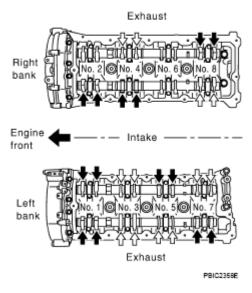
Locating Valve Clearances Mark Location Courtesy of NISSAN MOTOR CO., U.S.A.
